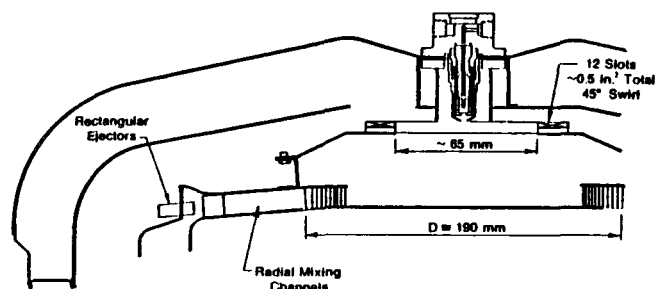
Ribbon Combustor with External Turbulator, 45° Swirl Angle
